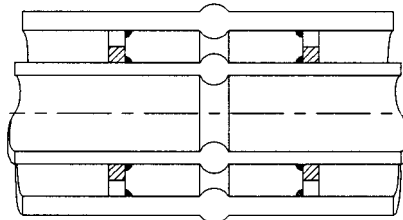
The illustration shows the final appearance of the joint section.
